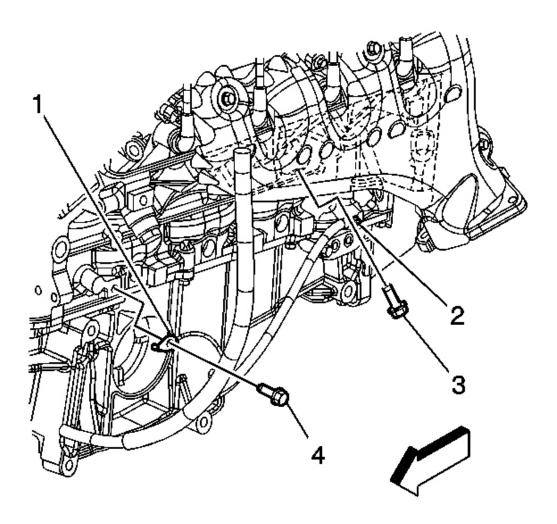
View Of Ground Terminal Bolts Courtesy of GENERAL MOTORS CORP.
